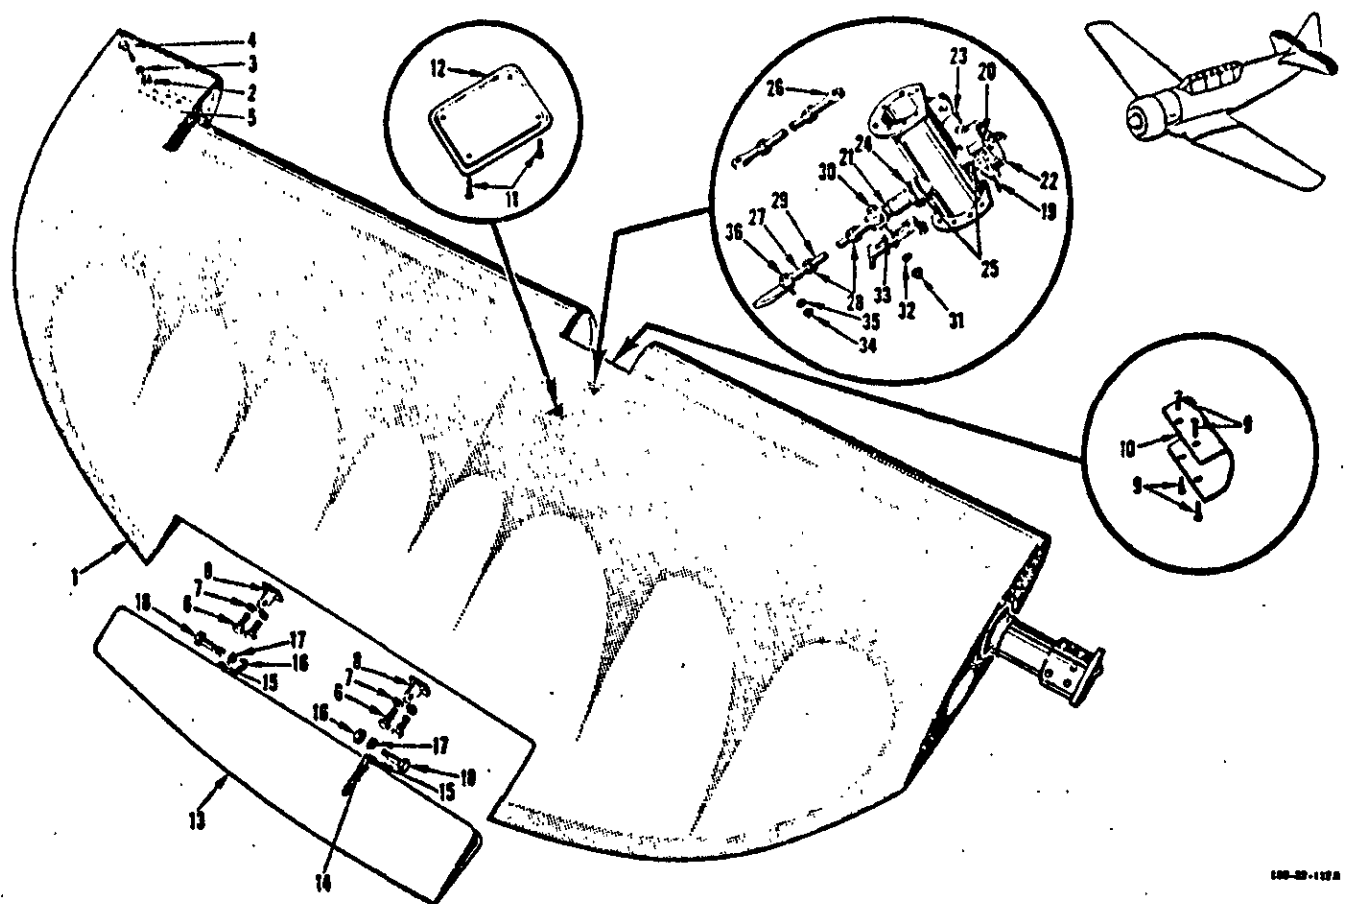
COVERED ELEVATOR ASSEMBLY
